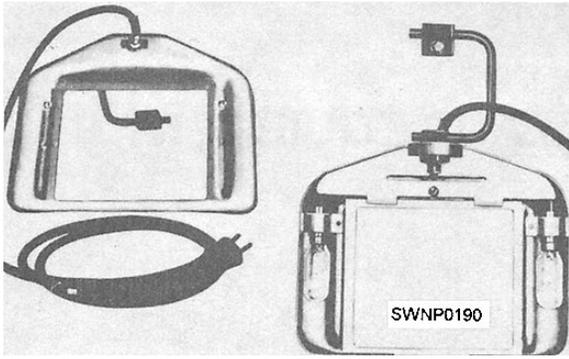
Eye shields for bench and pedestal type of grinders.
